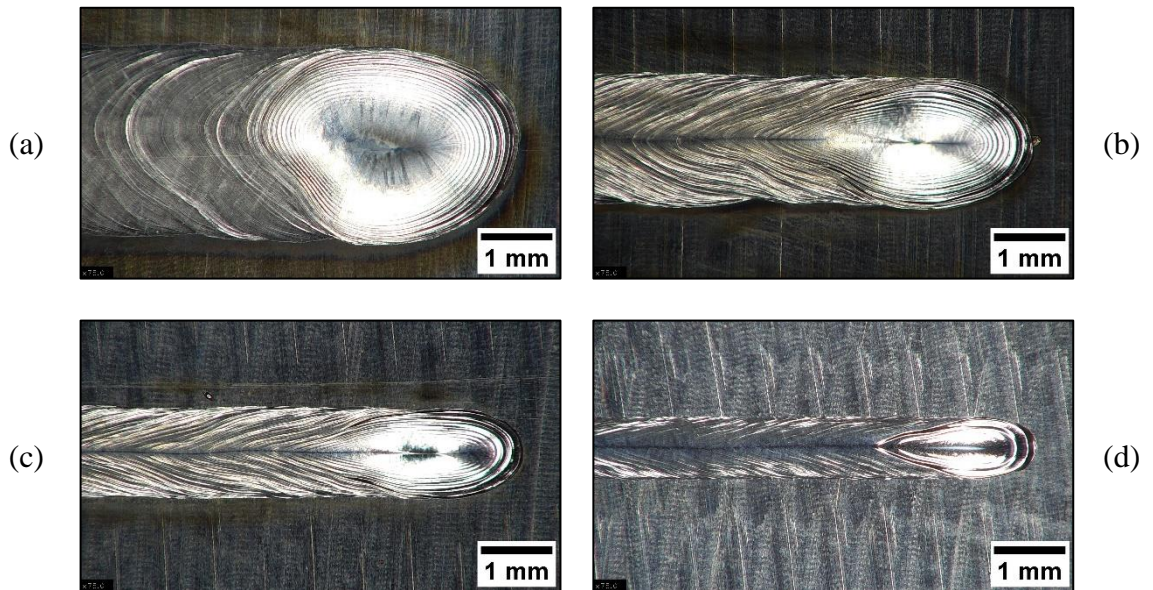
304L laser weld surfaces at 2400 W and travel speeds of 50 mm/s (a), 75 mm/s (b), 100 mm/s (c), and 150 mm/s (d).
